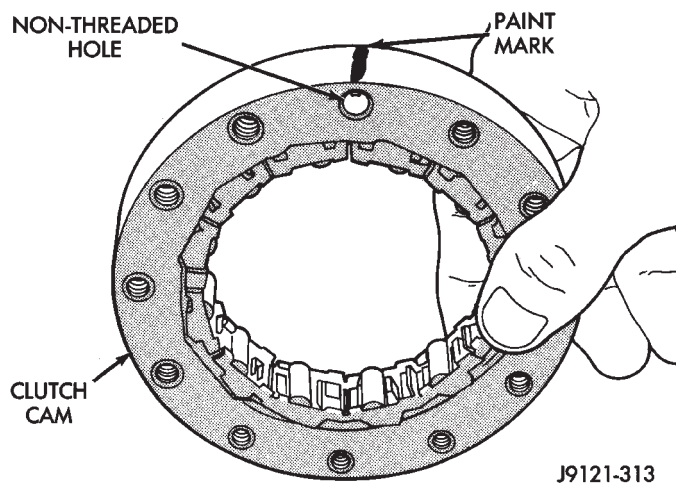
Marking Location Of Non-Threaded Hole In Clutch Cam
